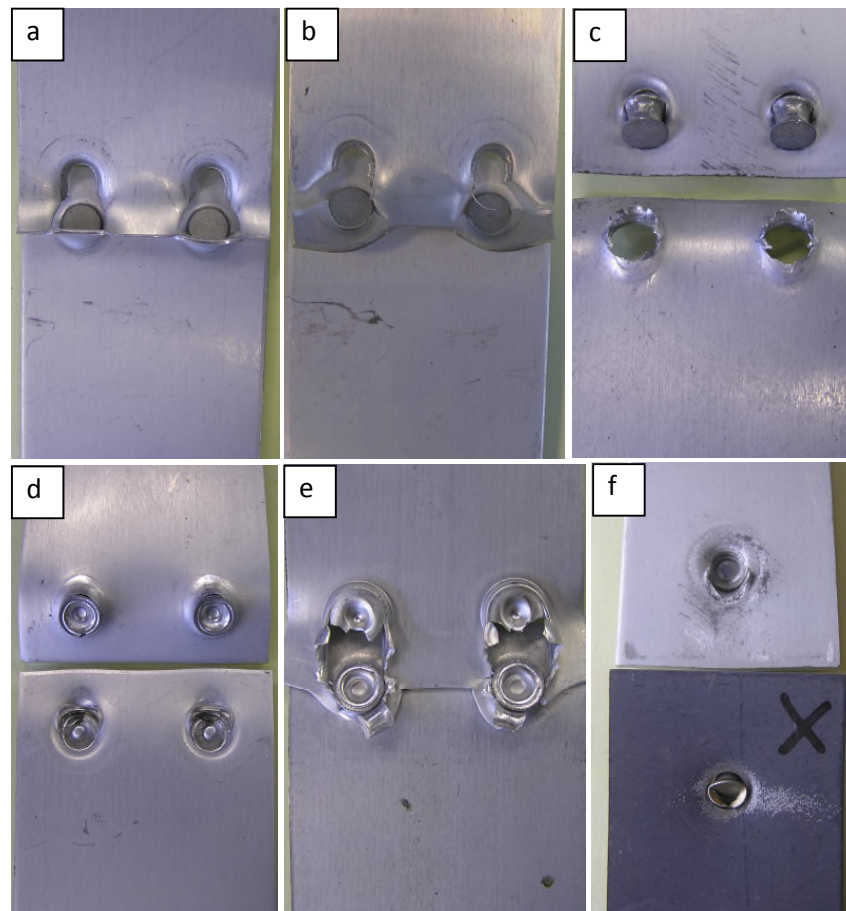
The failure modes of SPR joints in static lap shear tests, a) tearing of top sheet (1 mm AA5754+2 mm AA5754), b) tearing and cleavage of top sheet (1.5 mm AA5754+3 mm AA5754), c) rivet being simultaneously pulled out from top and bottom sheets (2 mm AA5754+2 mm AA5754), d) rivet being pulled out from bottom sheet (3 mm AA5754+2 mm AA5754), e) tearing of bottom sheet (2 mm AA5754+1 mm AA5754), and f) rivet being pulled out from bottom sheet and fracture of rivet head (1.4 mm boron steel+2.5 mm AA5754).
